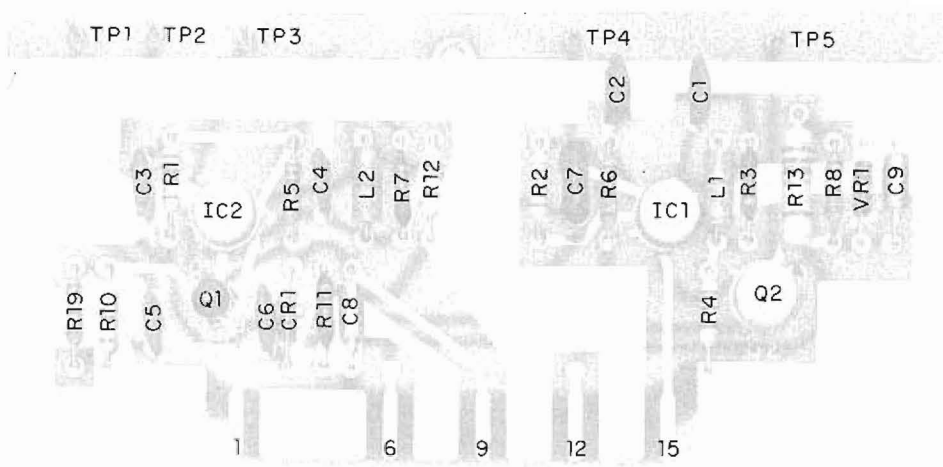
A4 Amplifier Board Assembly Component Identification and Location
